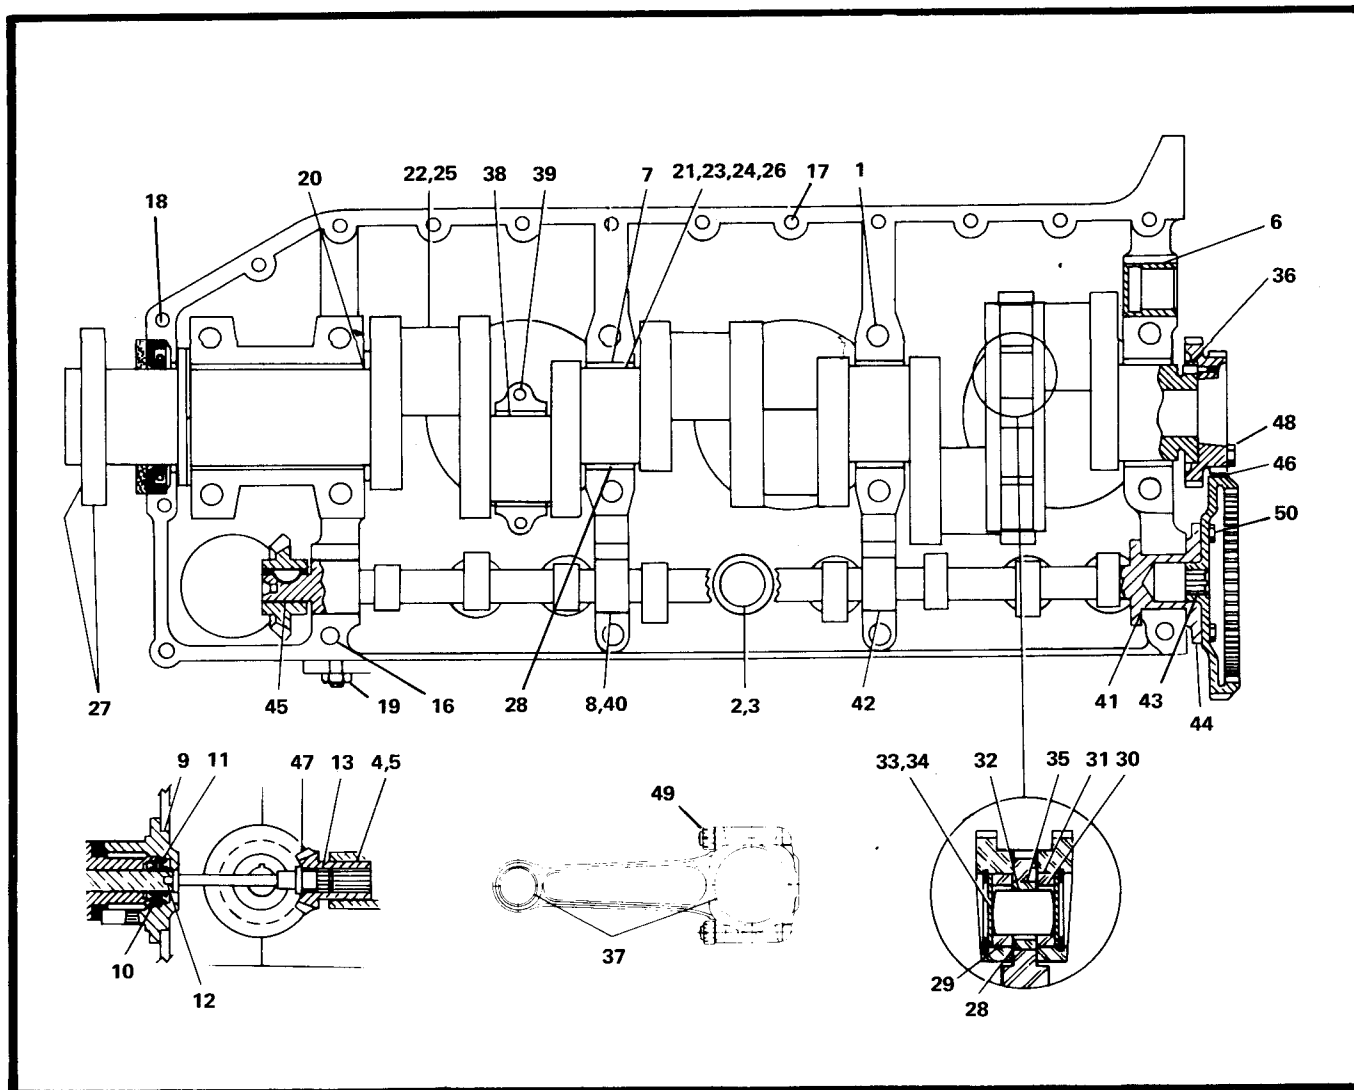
Crankcase Limits (Refer to Table XIII & XIV).
